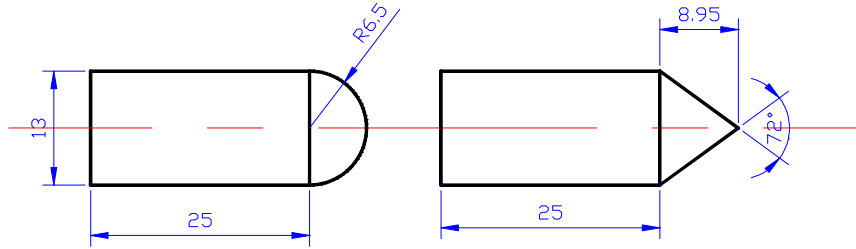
Geometry and dimensions (mm) of the projectiles used in the experiments.
